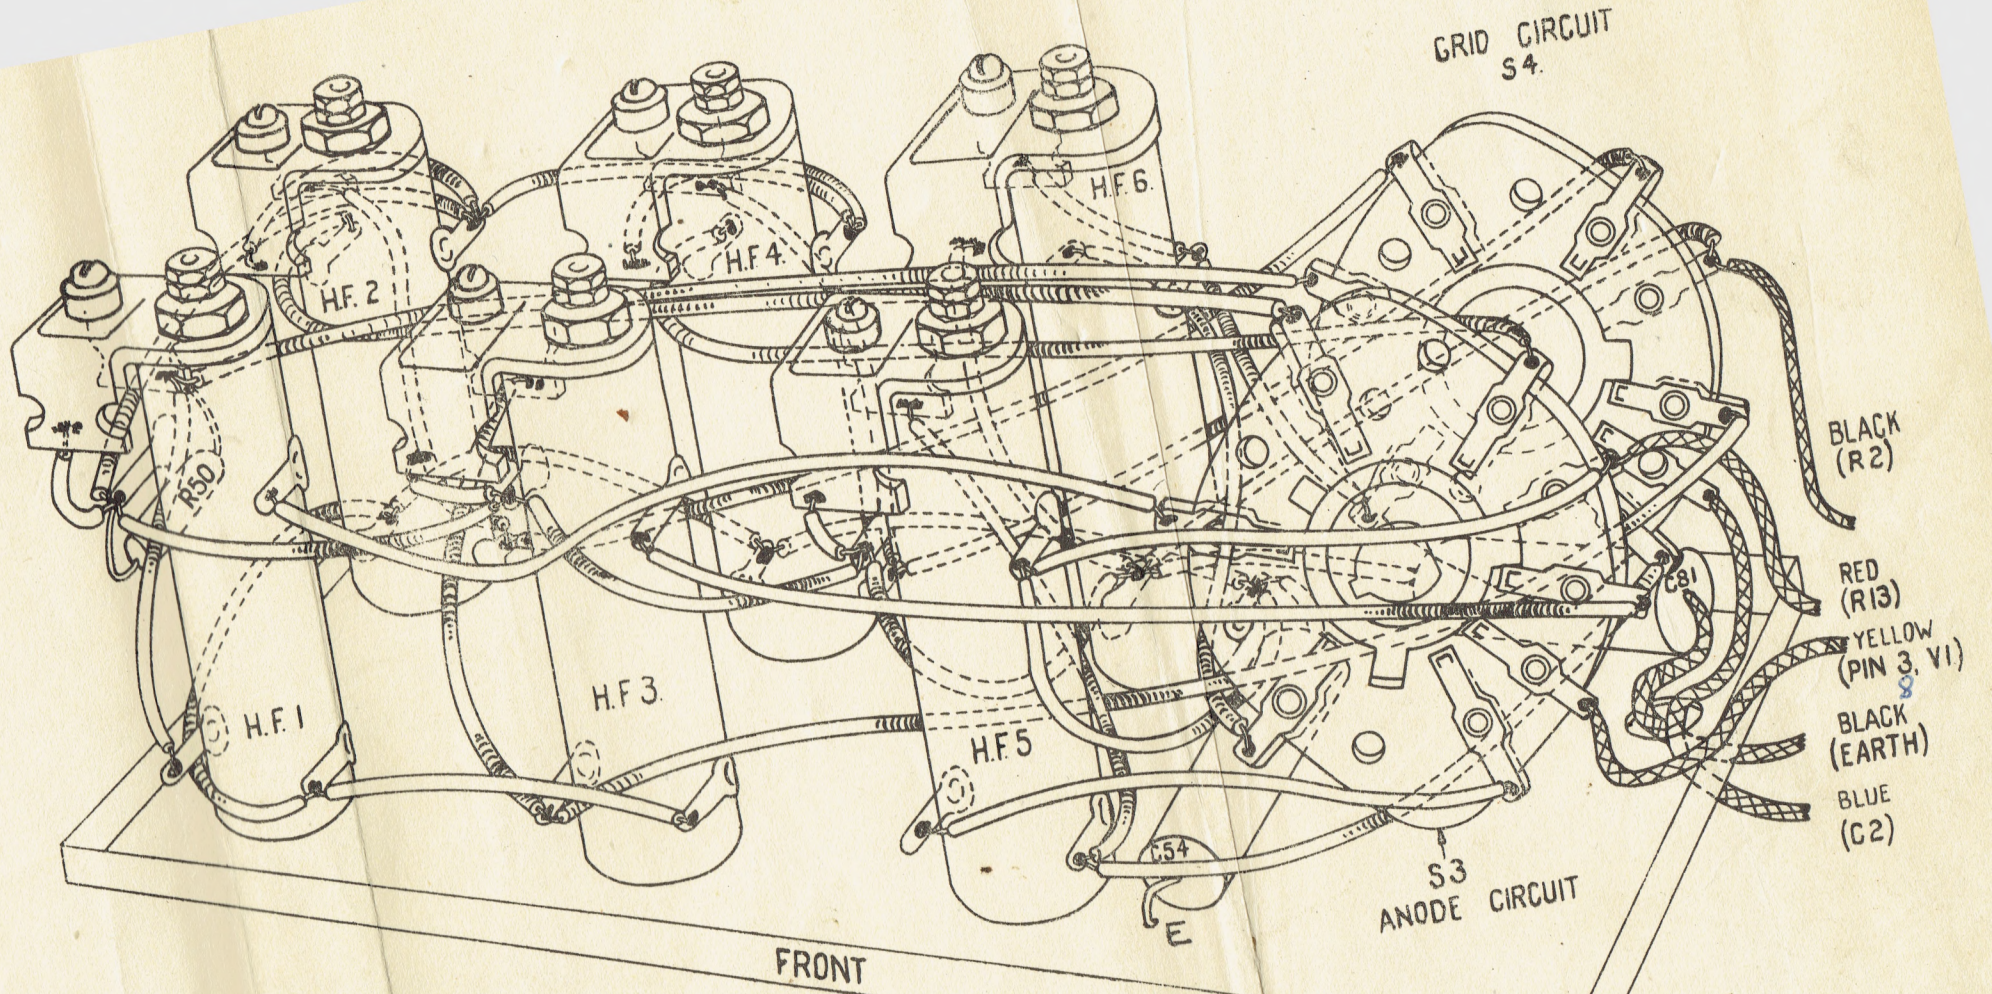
COIL ASSEMBLY. H.F. SECTION.
